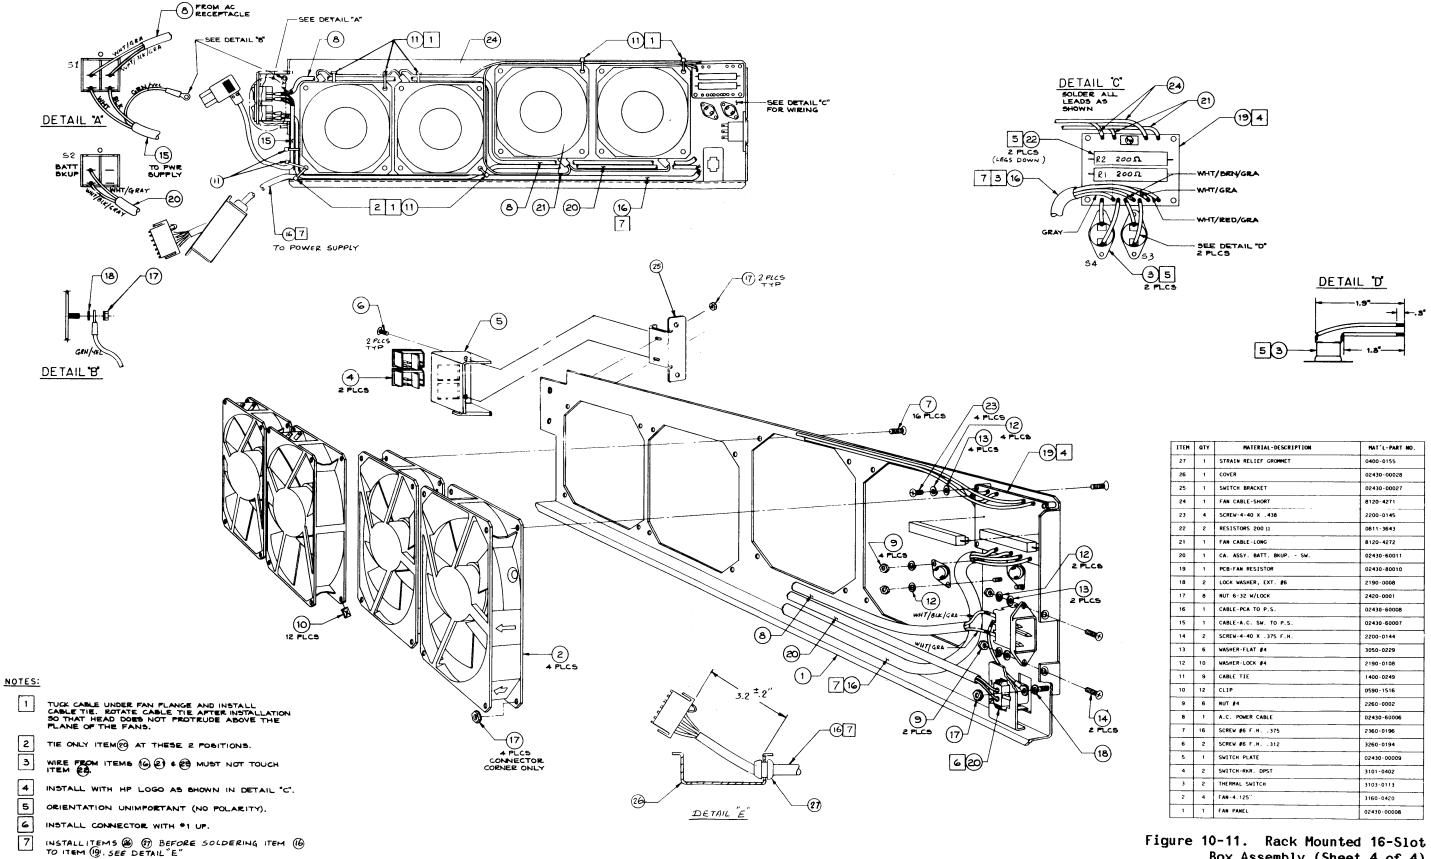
Rack Mounted 16-Slot Box Assembly (Sheet 4 of 4)
